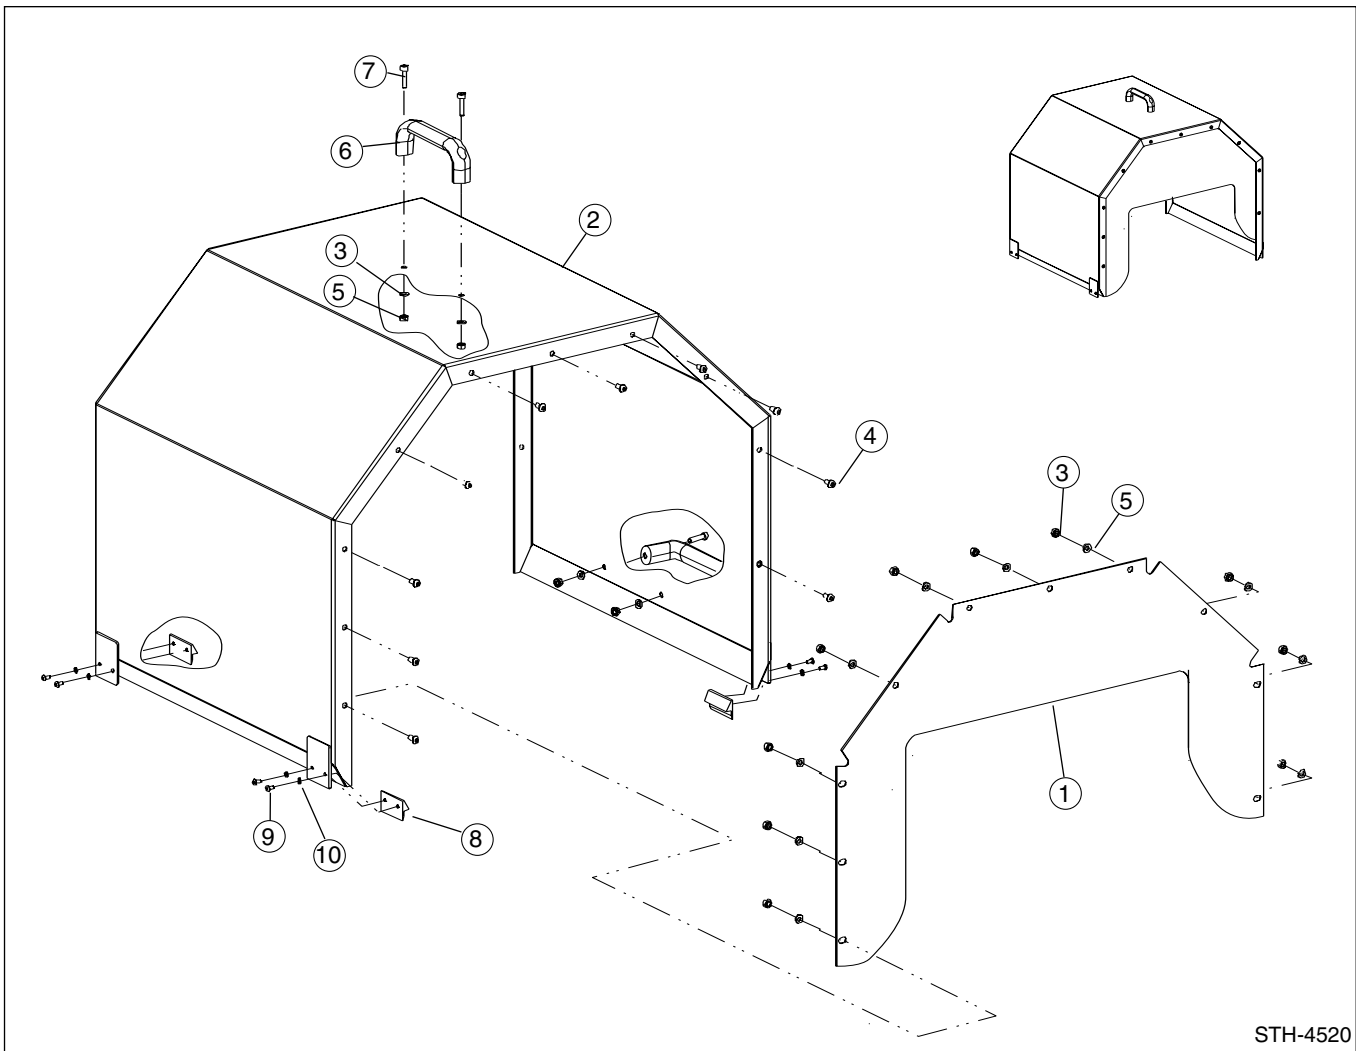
FIGURE L – REMOVABLE SPLASH GUARD ASSEMBLY, REAR (2 of 2)
